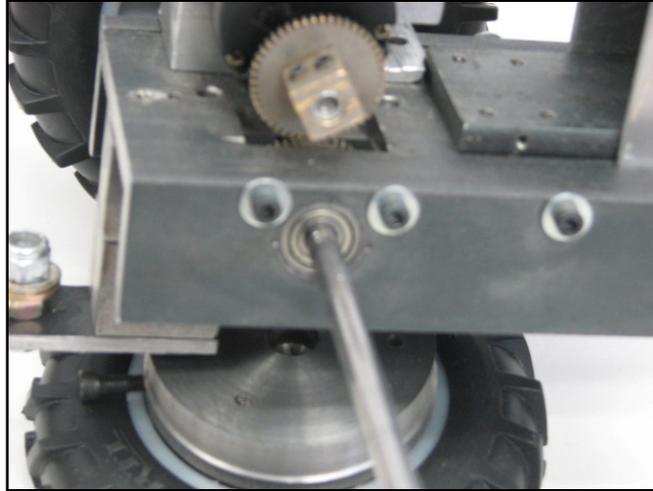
Bearing mounted in the rear frame. Divots that secure the bearing to the frame can be observed around the circumference of the bearing.
